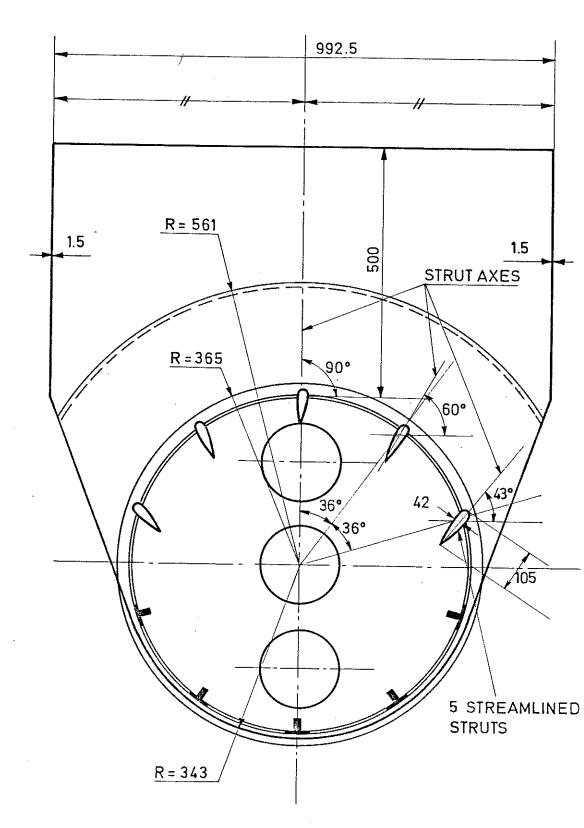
INSIDE OF CASING FOR COMPRESSOR INLET TEST FACILITY. SHOWING STRUT ORIENTATIONS FOR DESIGN I
